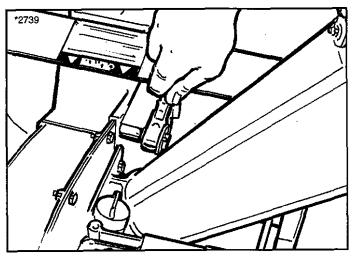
Remove Discharge Tube Hex Head Cap Screw And Hex Nut
